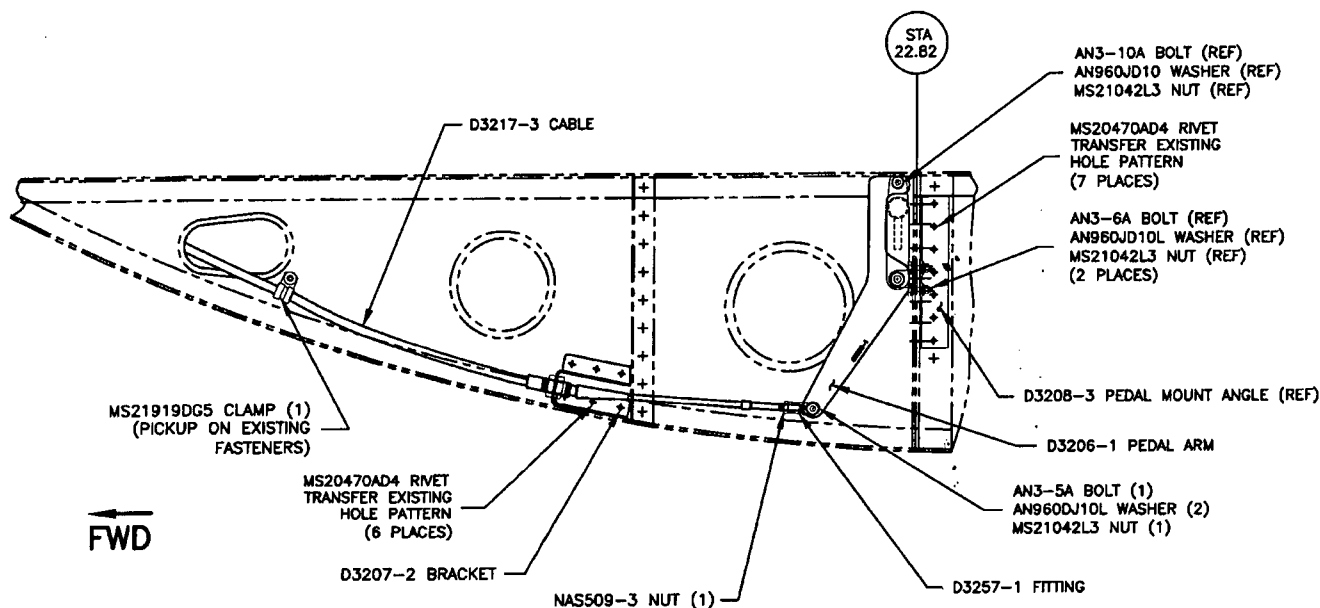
Detail B. View looking Aft (Pilot's Side)
